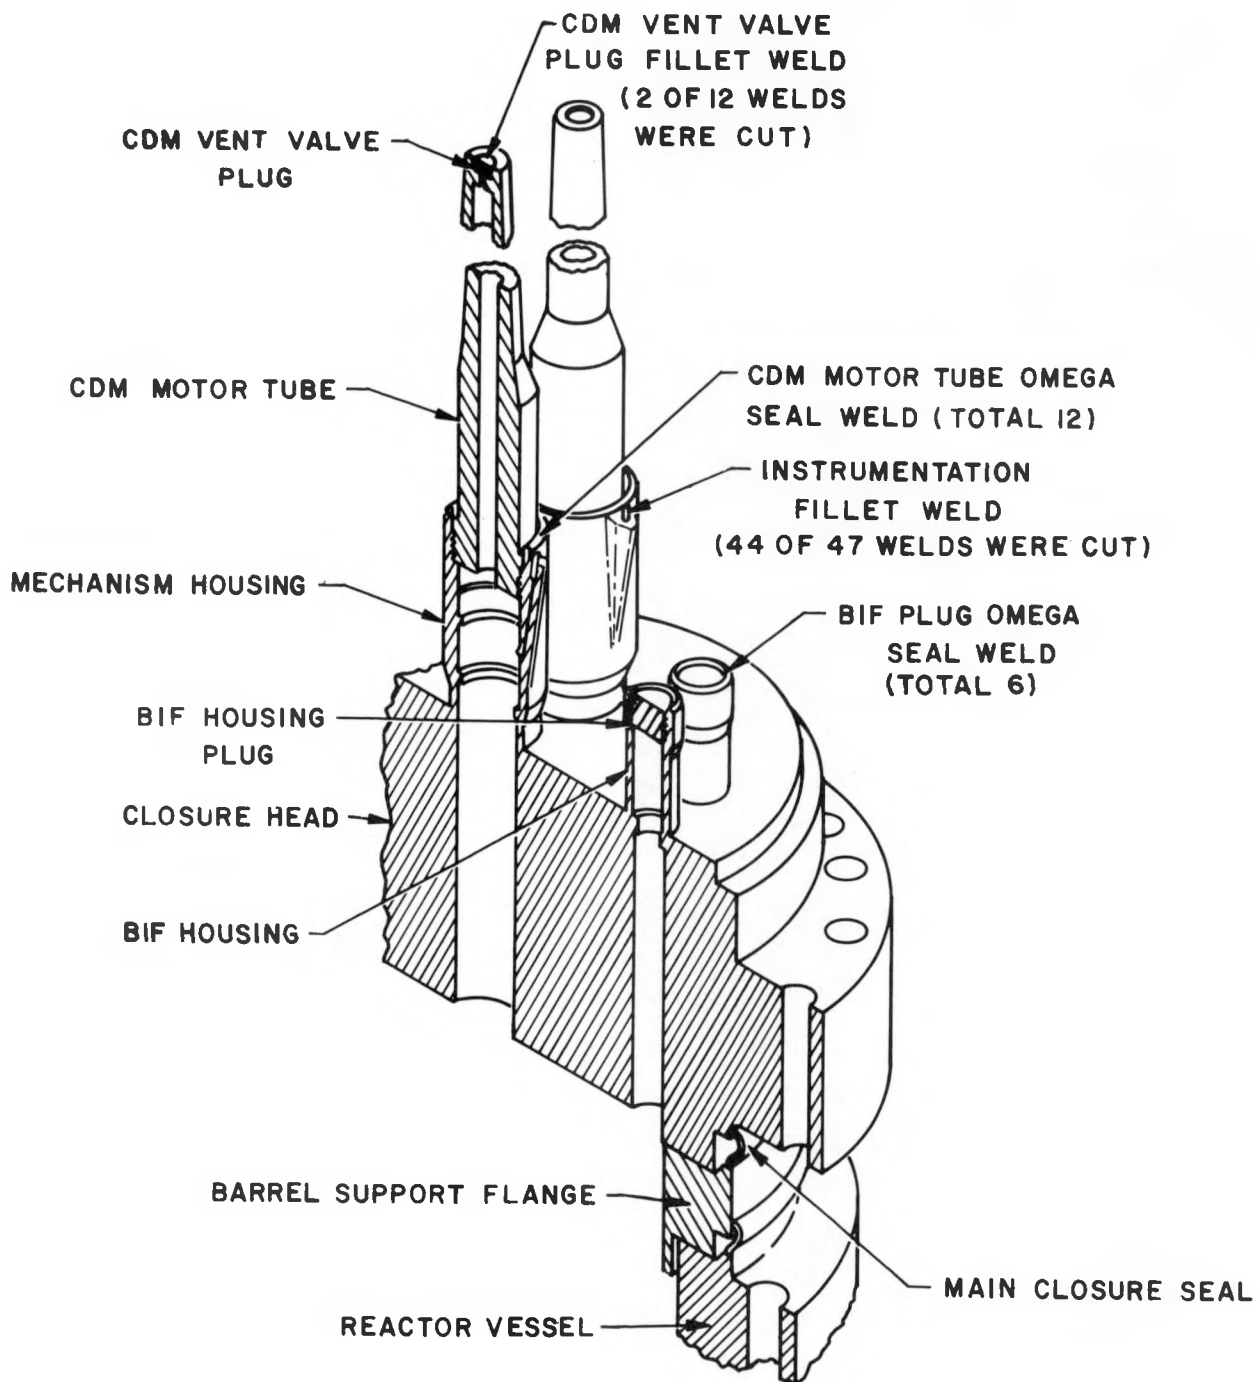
Locations for Cutting of the Pressure Boundary Welds on LWBR
